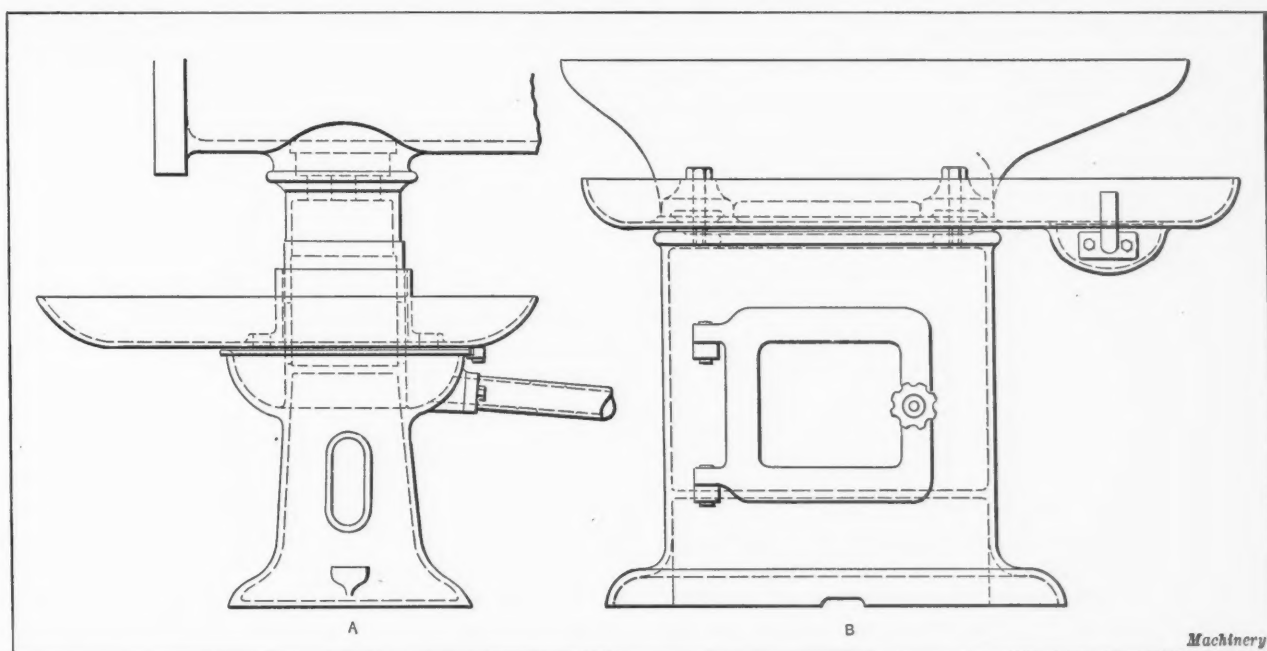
(A) Machine equipped with Tray that can be swung to One Side; (B) Sandwich Method of uniting Foot Tray and Machine Bed
